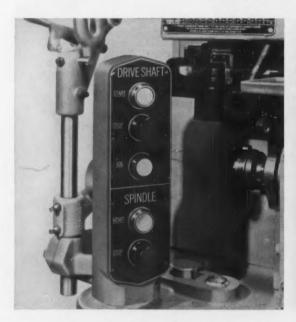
Close-up of conveniently located push-button control panel on machine shown in Fig. 1
